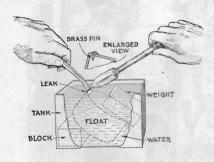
Solder carburetor or vacuum tank floats in this way to make a tight seal
